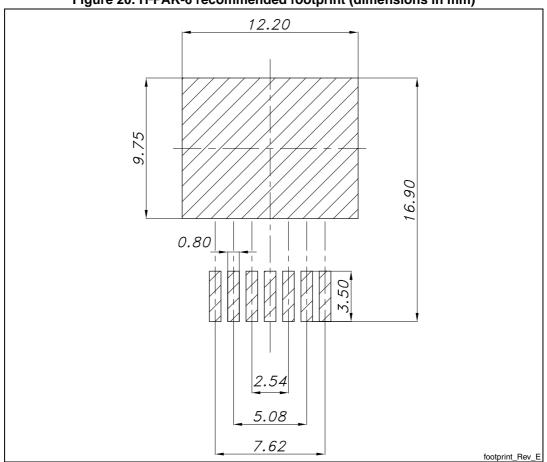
H²PAK-6 recommended footprint (dimensions in mm)
